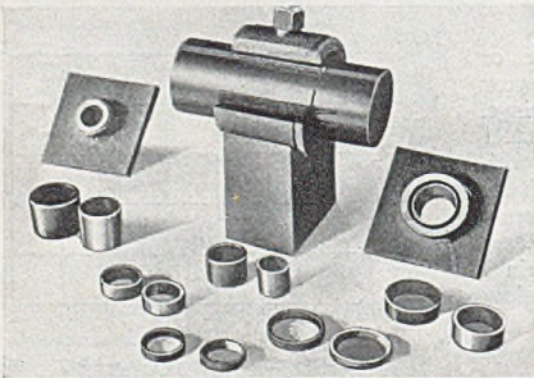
(above).—Aluminium-alloy bearing for heavy duty with minimum oil supply; the bush expansion keeps the bearing surface well cooled.
